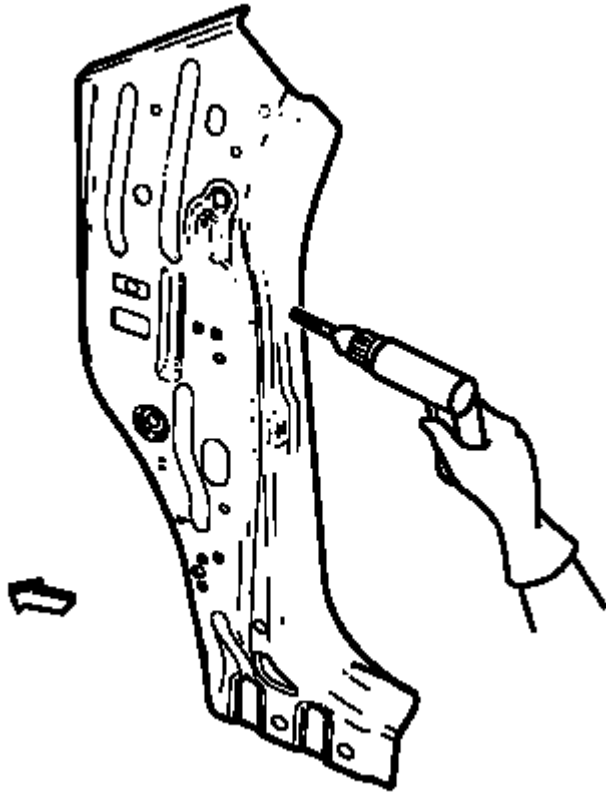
Drilling 8 Mm (5/16 In) For Plug Welding Along Edges Of Front Hinge Pillar Body
